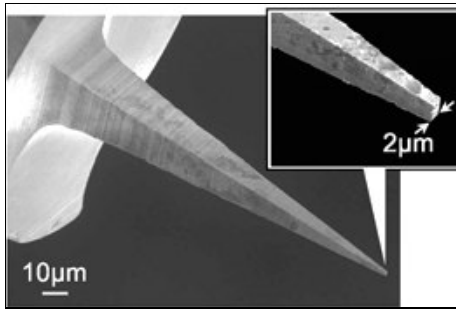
Micro-tool manufacture by ELID grinding [20]
